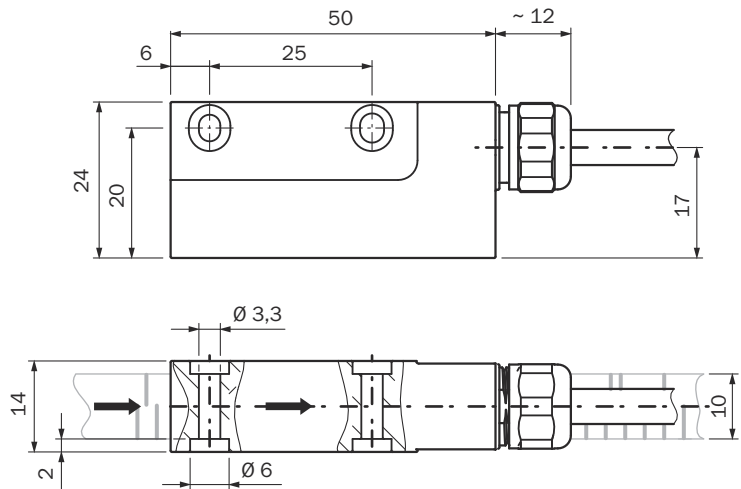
TTK50S dimensional drawing with cable outlet (all dimensions in mm)
